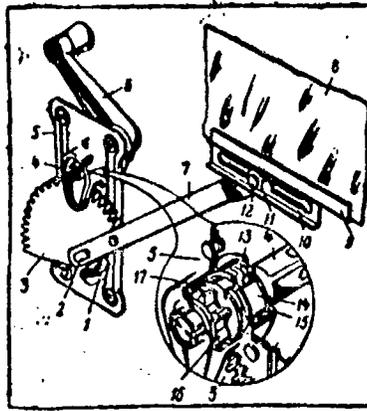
Roll-up Window Mechanism of ZIL-130 and ZIL-131 Cabin Door; 1, balancing spring; 2, axis of geared sector; 3, geared sector; 4, brake mechanism drive shaft; 5, window winder body; 6, window crank; 7, lever; 8, window glass; 9, clamp; 10, crosspiece; 11, roller; 12, roller axis; 13, brake mechanism spring; 14, drive mechanism shaft guide; 15, brake mechanism body; 16, driving gear; 17, gear support
